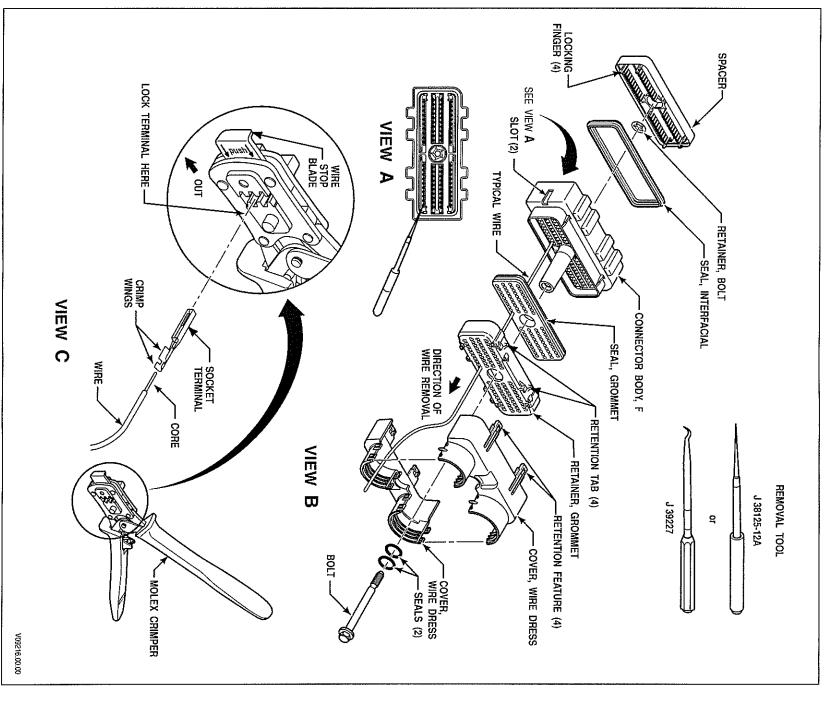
A. AFL 80F Bolt-Assist TCM Connector
